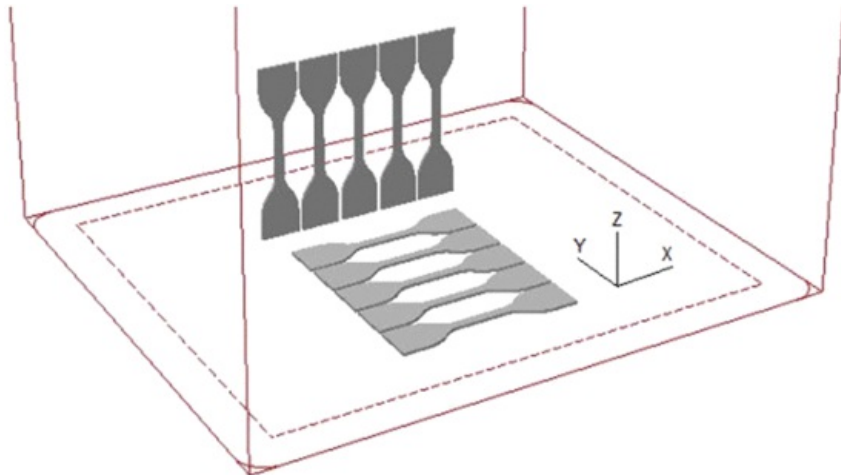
Build layout of tensile specimens (X-axis and Z-axis).
